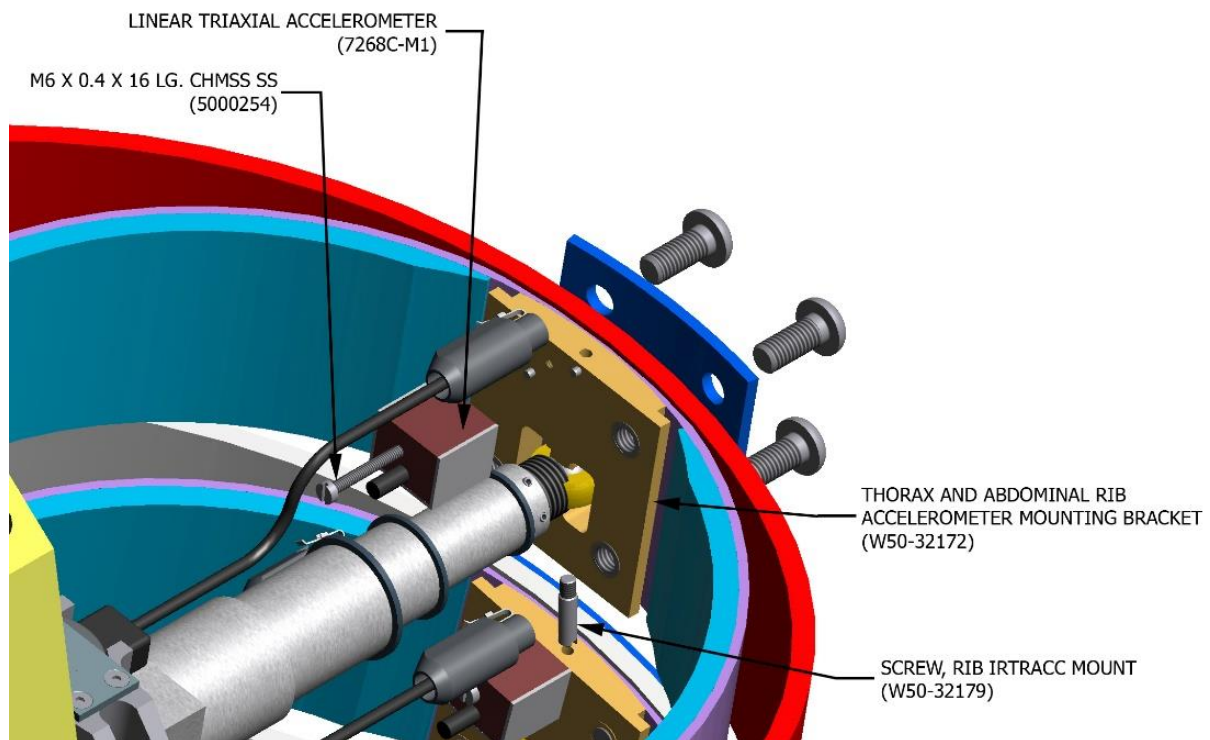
Removing the linear triaxial accelerometer and 2D IR-TRACC.
